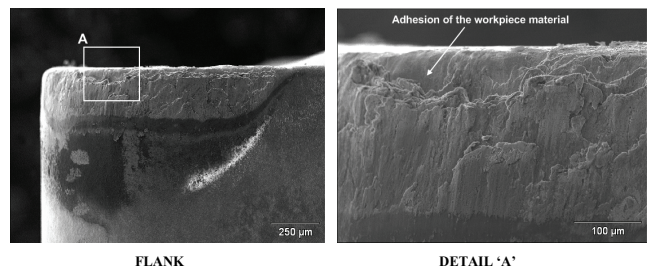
Flank wear land of the cutting edge used to cut the L3 alloy at the end of tool life - $v_c = 250$ m/min.
